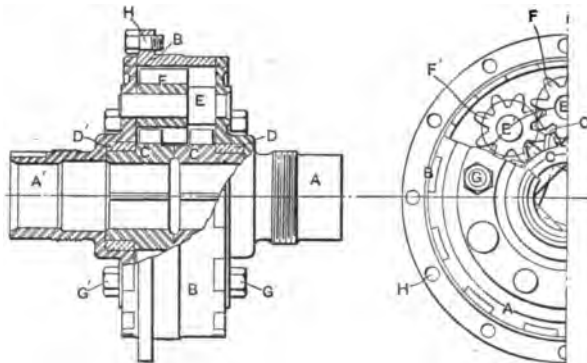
Details of Construction of the 7-inch Equalizing Gear
